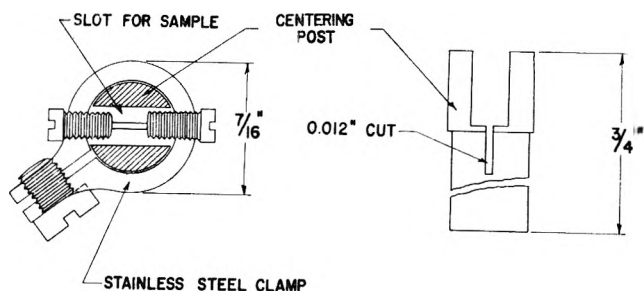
Holder for each end of the sample to clamp it in jig for cementing and conditioning, and in torsion pendulum for measurements.
